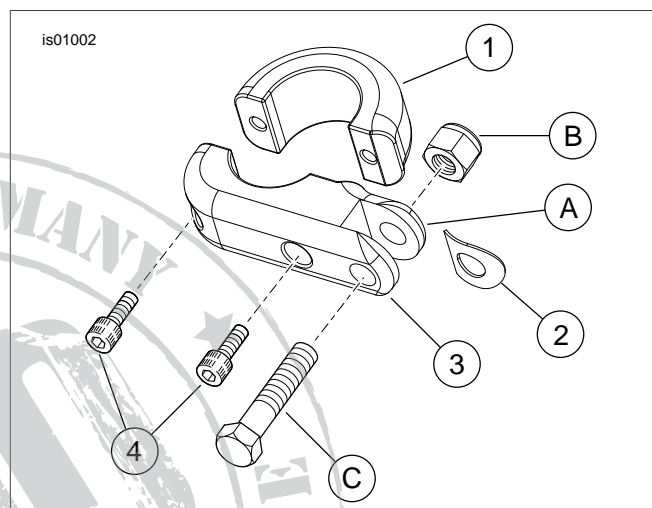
Service Parts: Engine-Guard Footpeg Billet Mounting Kit
